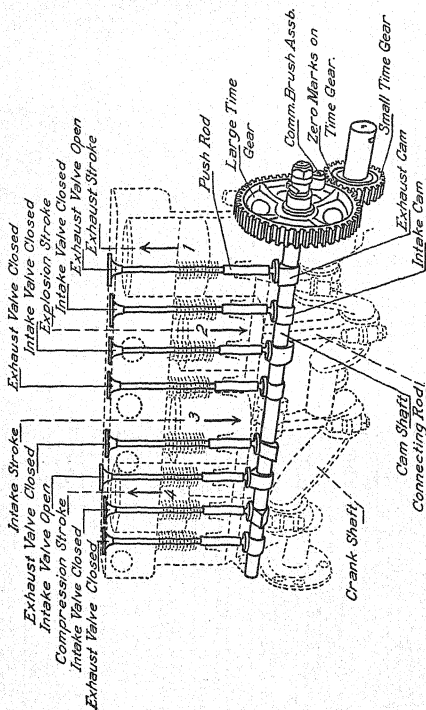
Phantom view of the Ford engine showing the time gears, cam shaft, and valve mechanism.
